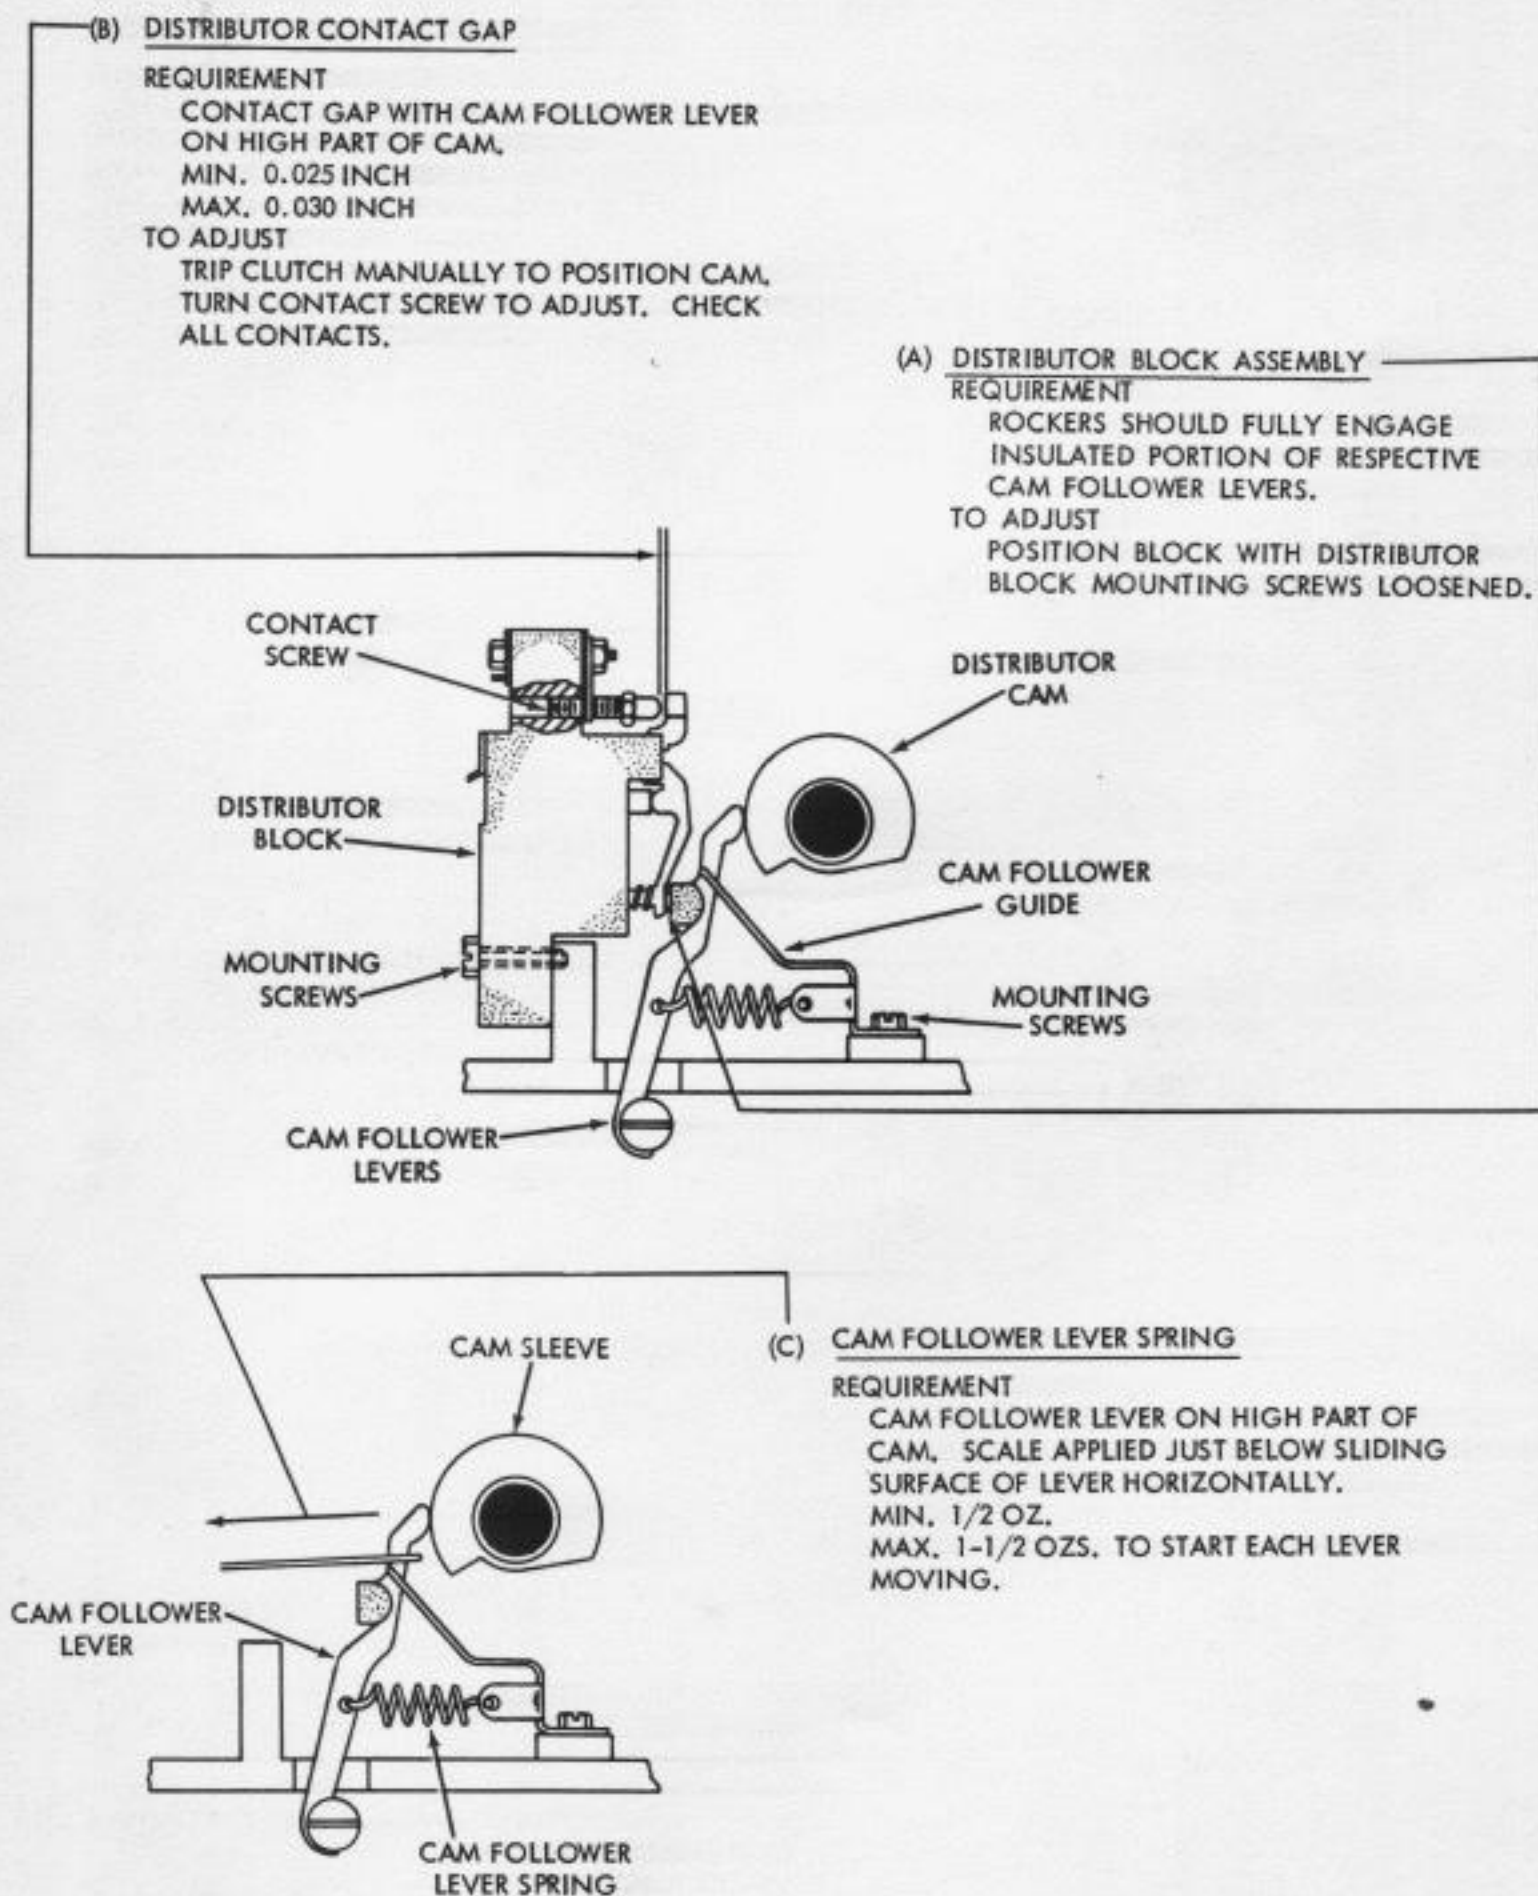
DISTRIBUTOR CONTACT MECHANISM
